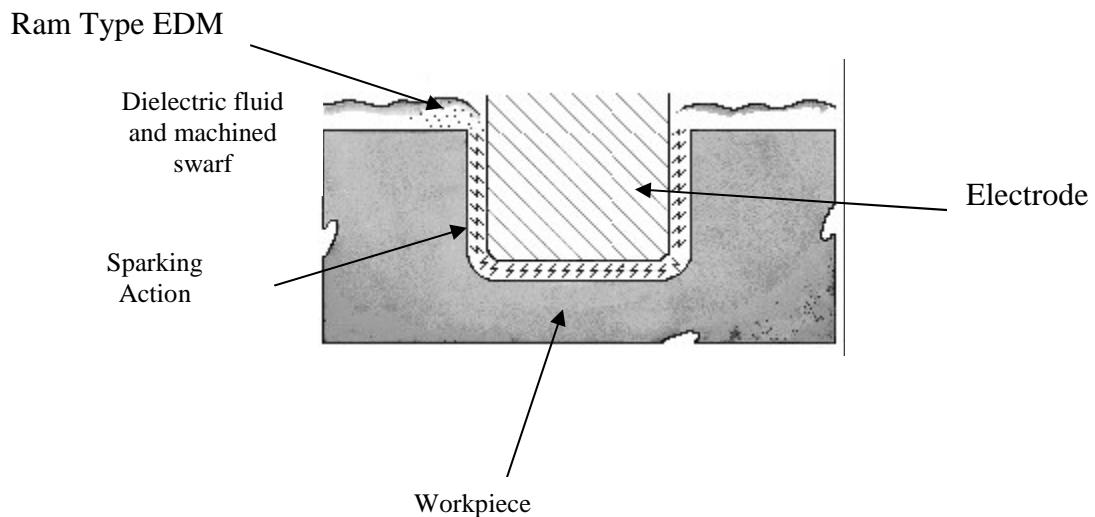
A cutting tool (electrode) shaped to the form of the cavity
